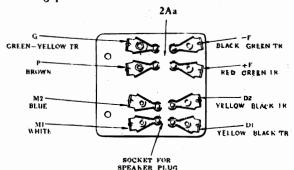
View of Under-Side of Speaker-Plug Socket and Socket 2Aa on Models 13, 16, 17 and Early 53.
